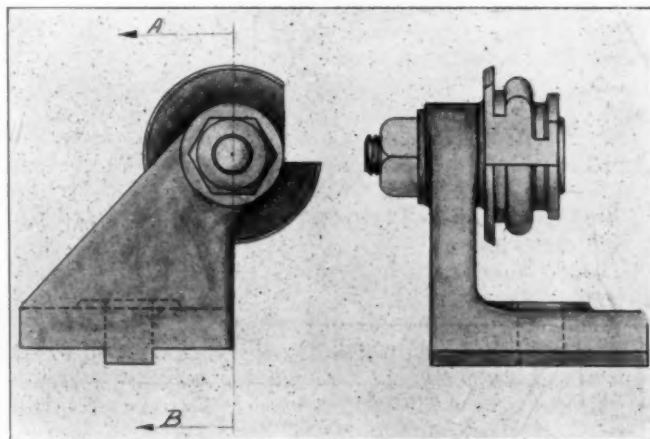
CIRCULAR FORMING TOOL-HOLDER.
